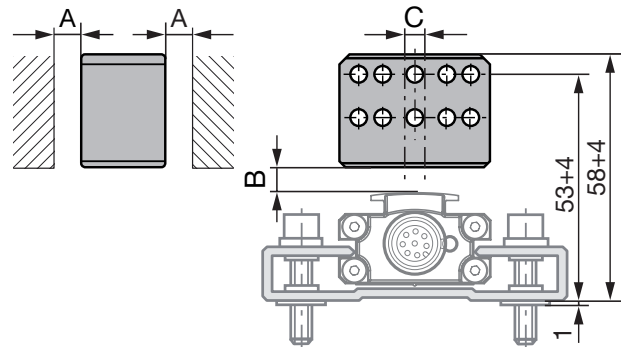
Dimensions and distances with BTL6-A-3800-2 magnet
